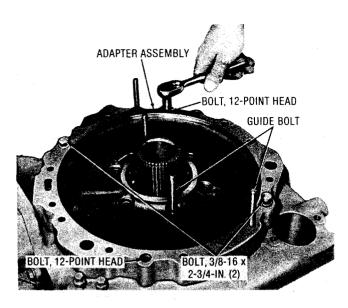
Installing adapter assembly bolts (TRT-3 overdrive)
